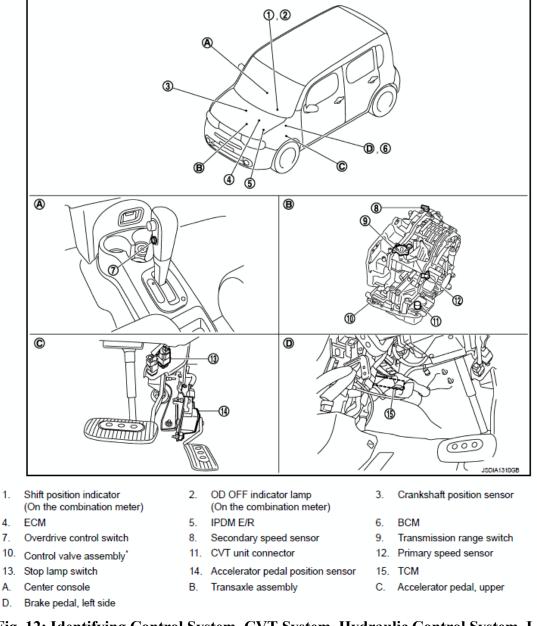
Identifying Control System, CVT System, Hydraulic Control System, Lock-Up And Select Control, And Shift Control Component Parts Location Courtesy of NISSAN MOTOR CO., U.S.A.
